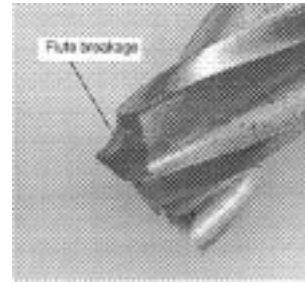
Tool flute breakage for end milling (cutter diameter: 8 mm, cutter flute 4).
